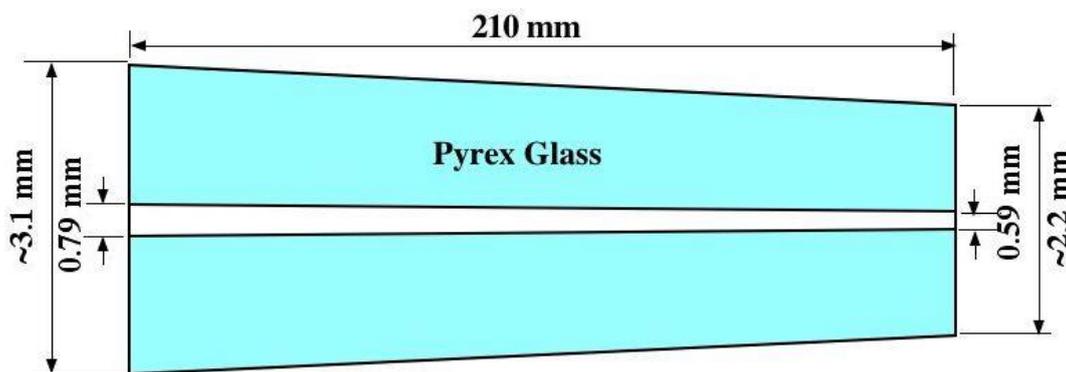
Structure of conical-shaped XGT. Cross-sectional drawing.
